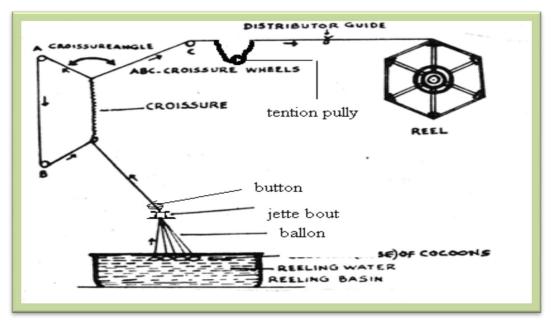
aThread formation in Multi-end reeling machine
